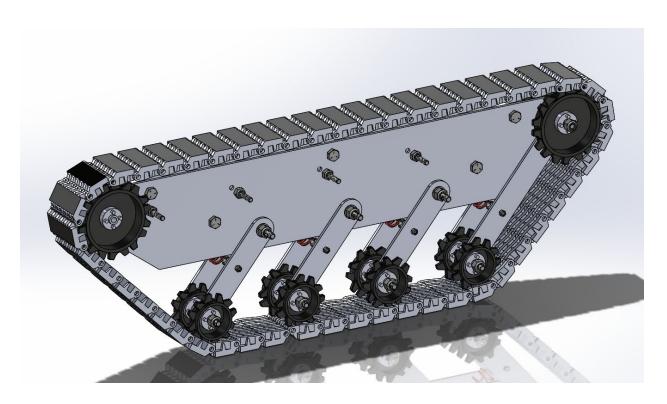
Final Tread Sub-Assembly with outer tread plate
